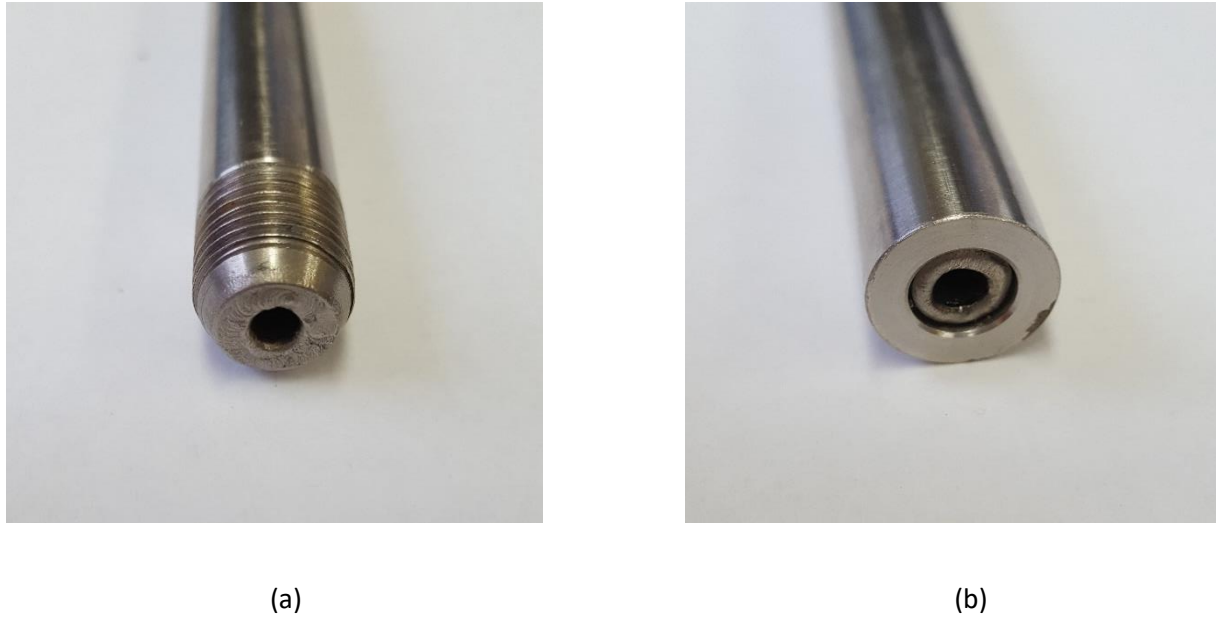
Sleeved HIP tubing (a) welded end (b) open end
